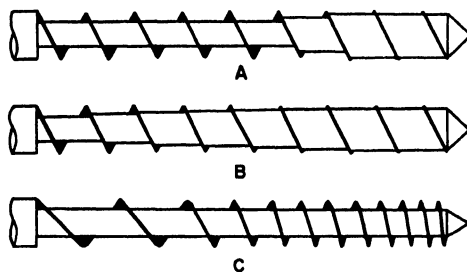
Typical screw designs. Key: A, nylon type; B, polyethylene type; C, rubber type.
